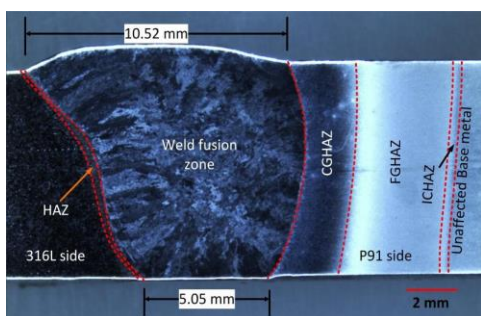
Optical image shows the macro view of the 316L SS - P91 steel weldment
